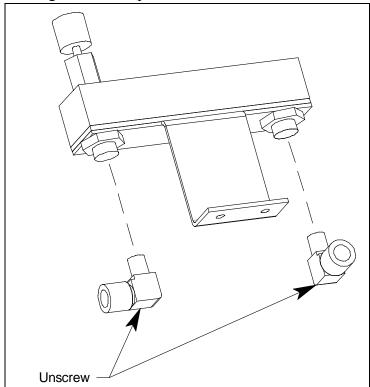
H₂S Dilution Sample Flowmeter Fitting Removal
